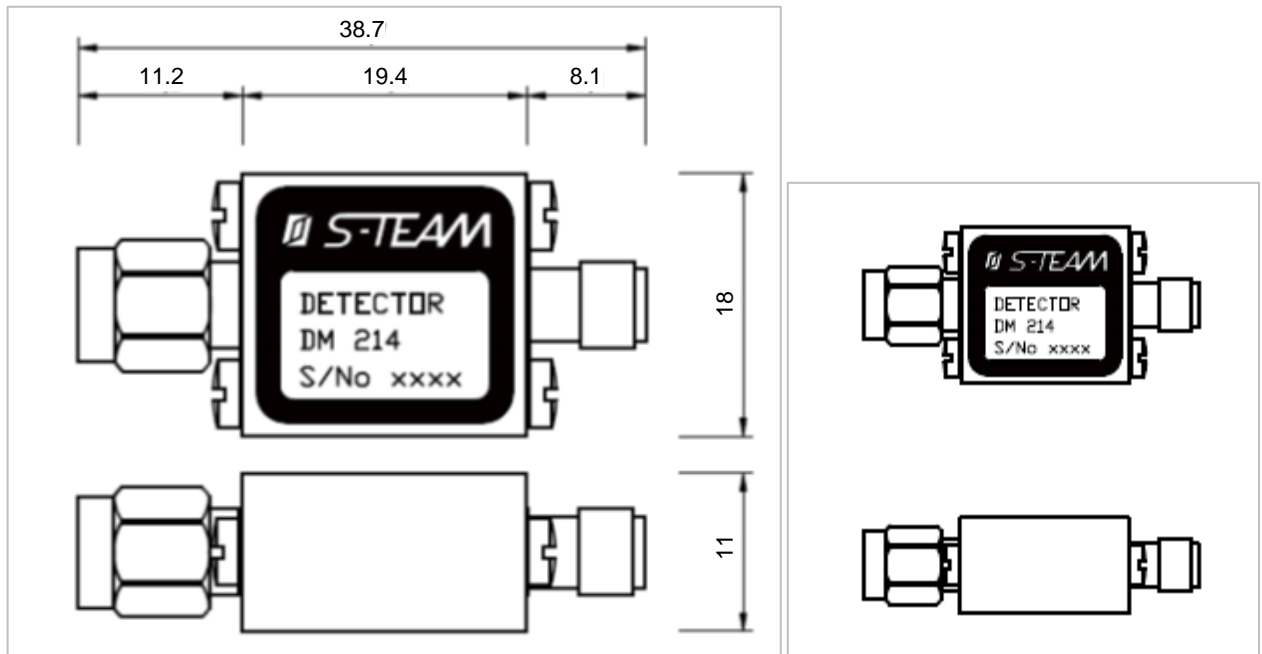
Basic DM314 dimensions in millimeters (the dimensions are the same as for the DM214 shown). Right: Actual size.
